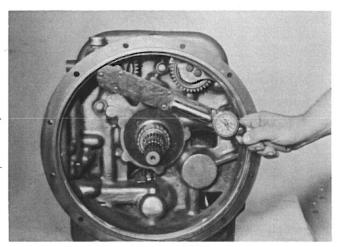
Tighten pump drive gear capscrews 23 to 25 ft. lbs. torque [31,2 - 33,9 N.m.].
